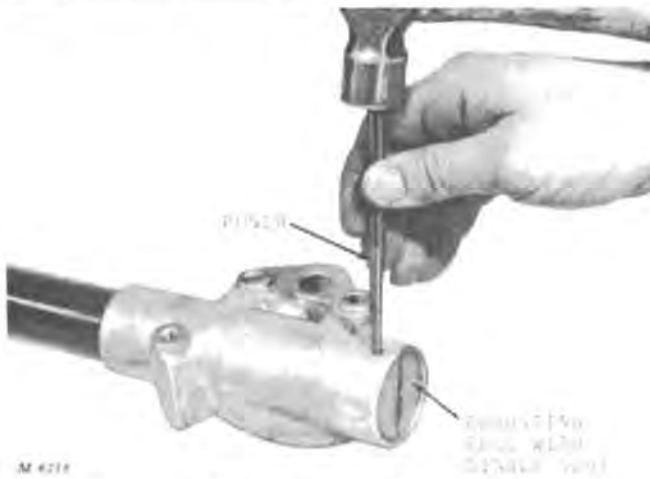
Locking Plug in Housing - Tractors ( 51052)
